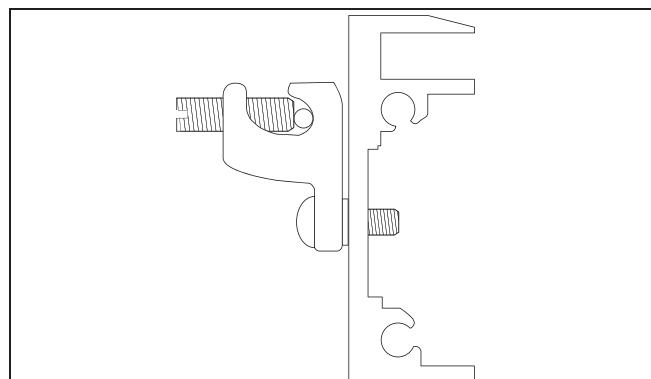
Guide self-cutting stainless-steel screw into earthing hole
